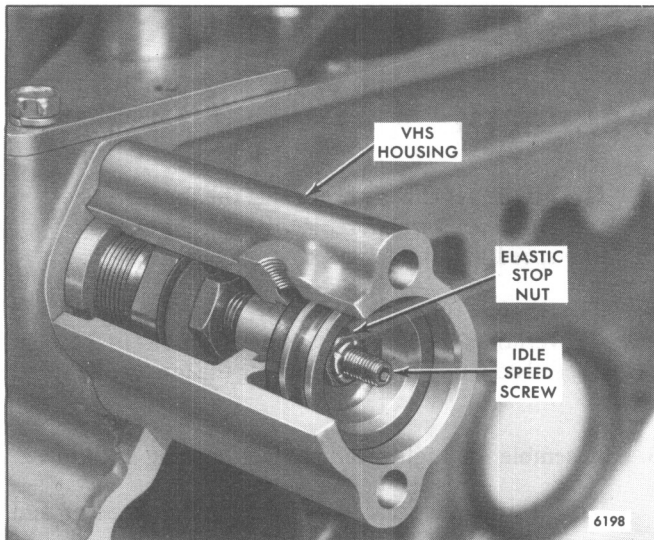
Adjust Elastic Stop Nut using Tool J 28598-A
